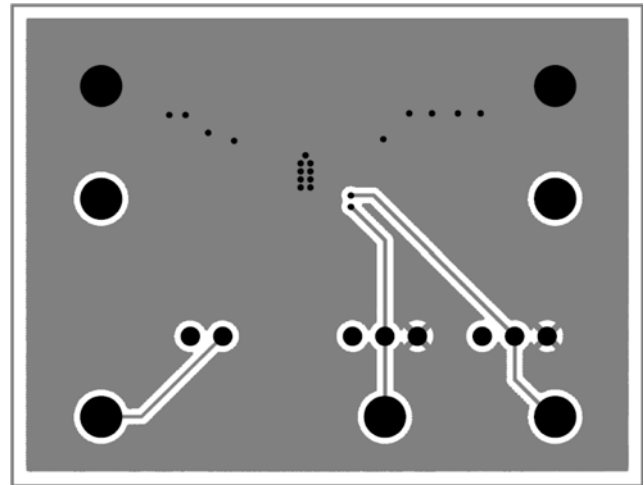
BOTTOM LAYER of the DEMO BOARD
